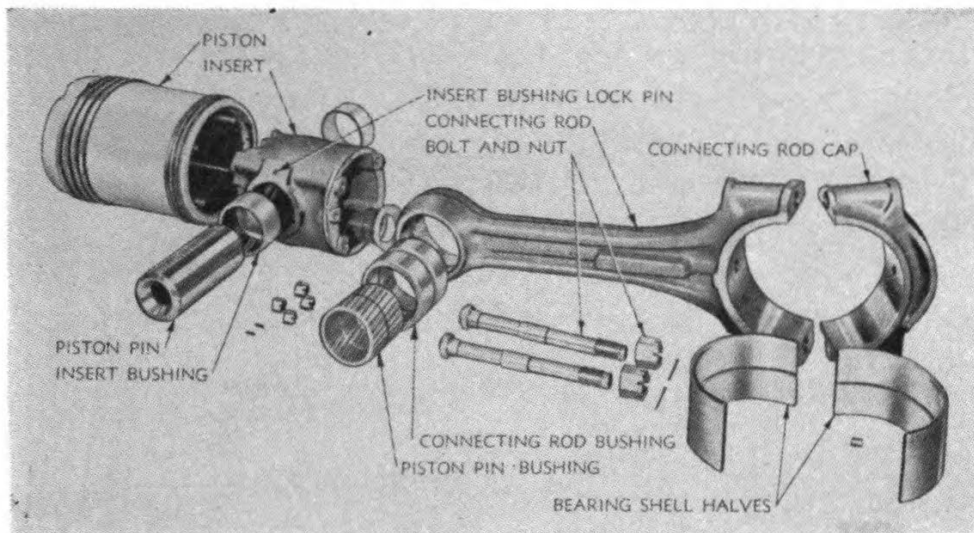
Piston and rod assembly with sleeve bushing type bearings (FM38D8 1/8).
